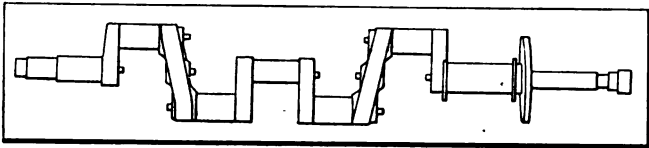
Crankshaft of the Marmon is a single steel forging of large dimensions
